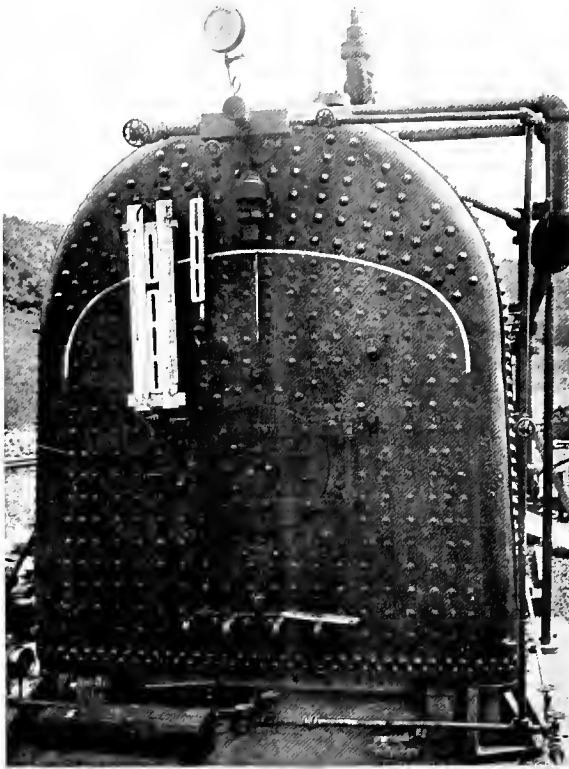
Photograph of boiler head of radial-stay boiler showing special water gage-glasses and gage-boards for indicating the water-level in boiler during low-water test. Readings were made from shelter by means of telescopes.
